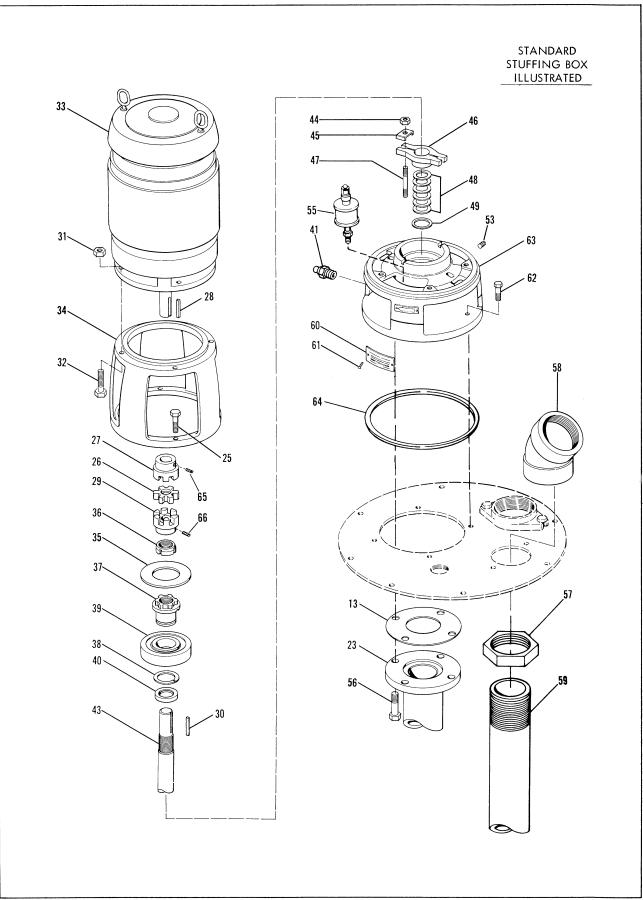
Model 631-632 Exploded View (Sheet 1 of 3)
